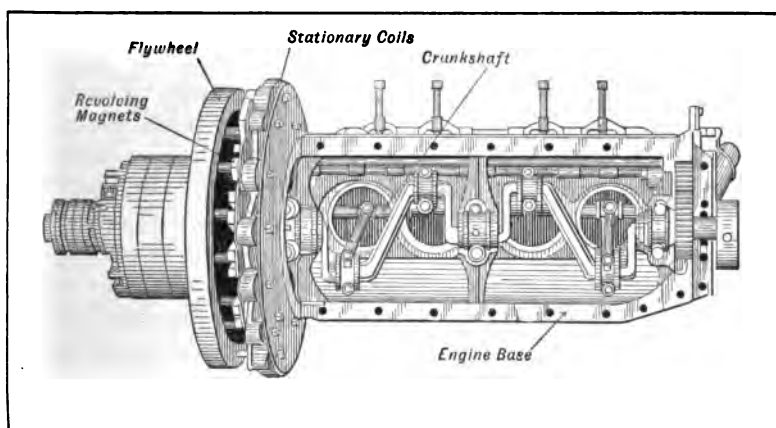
The Ford Magneto is Integral with Engine Base and Revolving Magnets are Attached to Flywheel Permitting Direct Drive from Crankshaft without Gears.
